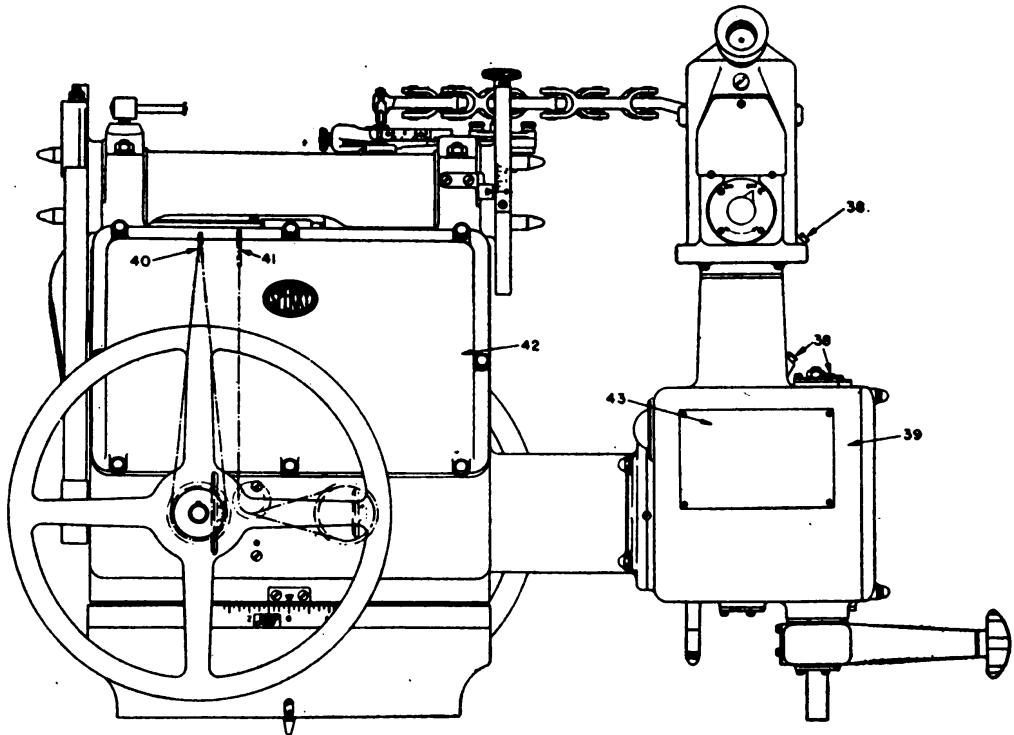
FRONT VIEW—CORRECTOR ASSEMBLY (Sperry drawing No. 644129-B).
